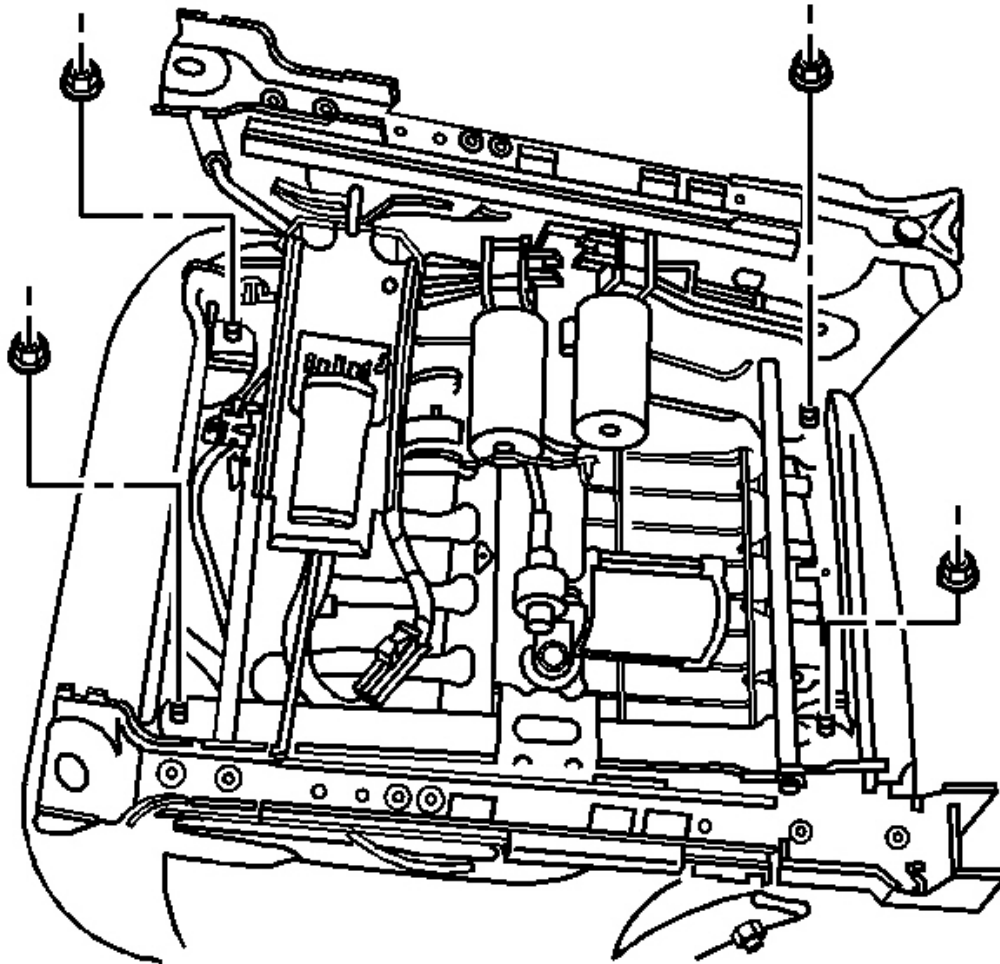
View Of Underside Of Seat Adjuster Frame & Mounting Nuts
